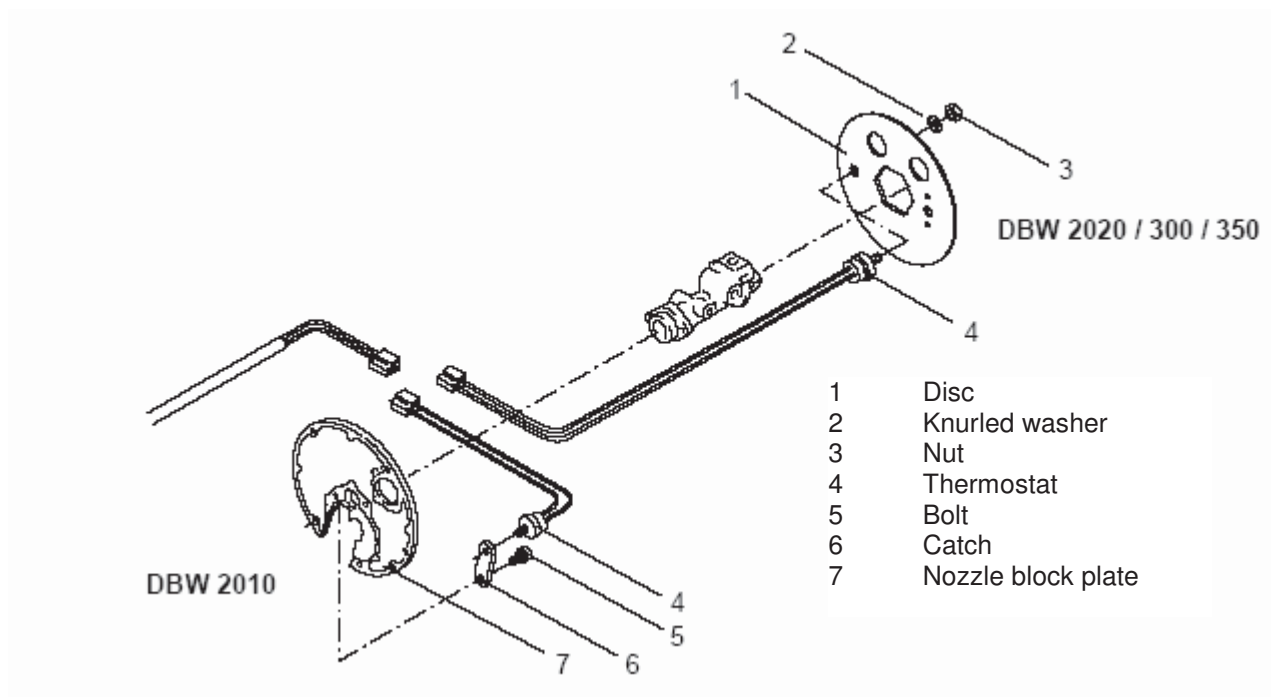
The replacement of the pre-heating thermostat of the nozzle block
